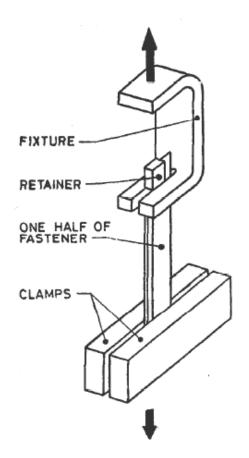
LONGITUDINAL LOAD TEST FOR RETAINING OPEN END FASTENER
